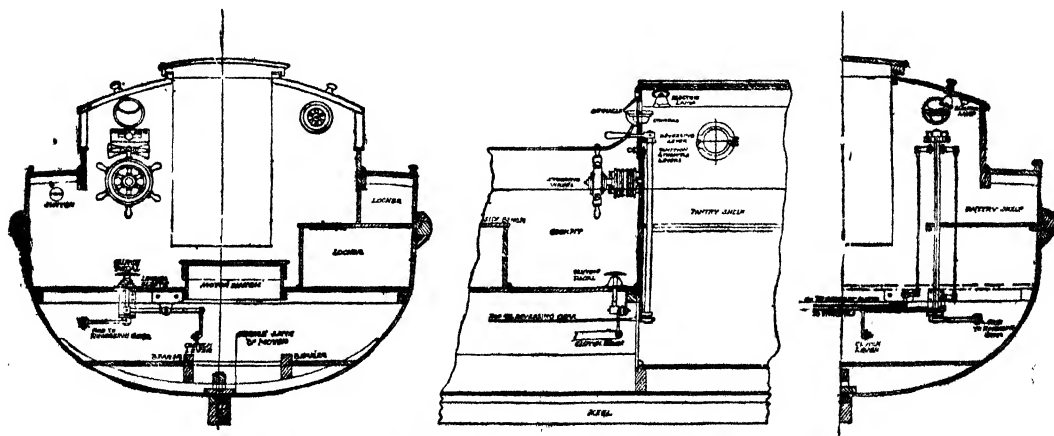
The engine and vessel control arrangements in a motor cruiser.
